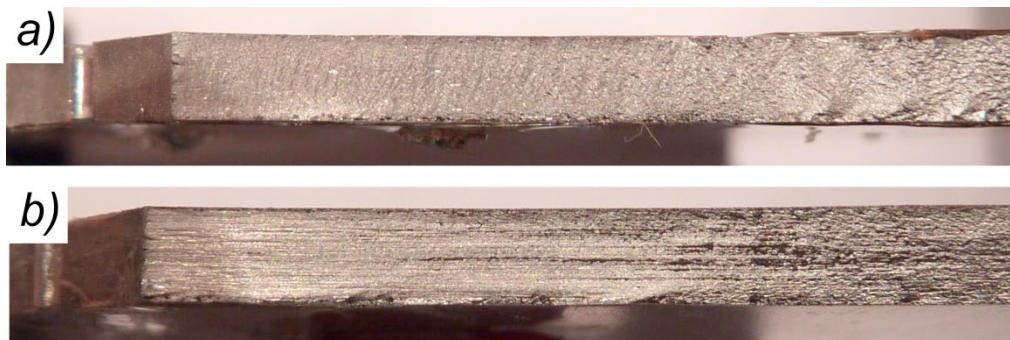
Typical fracture surfaces: (a) L specimen, (b) T specimen.
